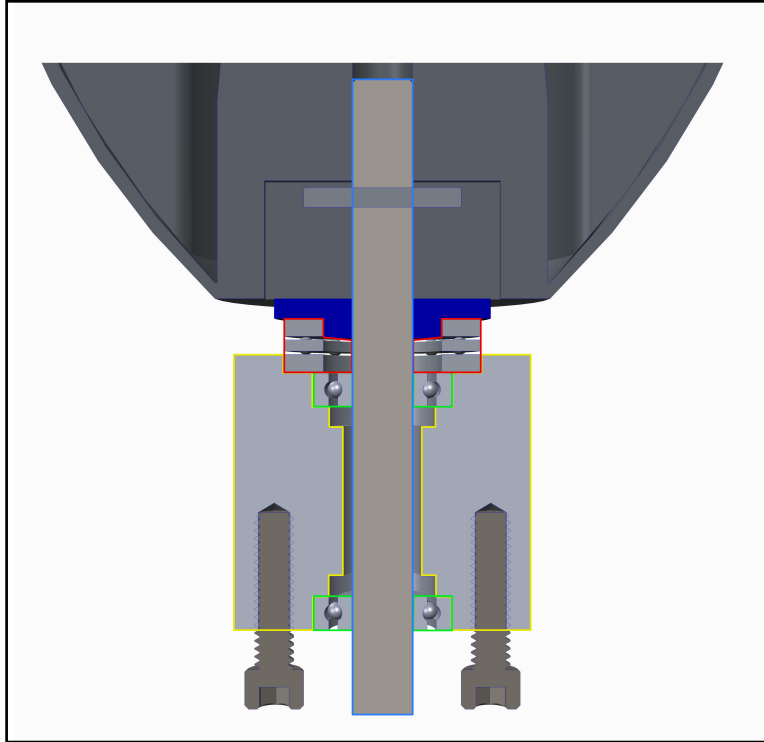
Cross Section View of Bearing System Enabling Frictionless Rotation
